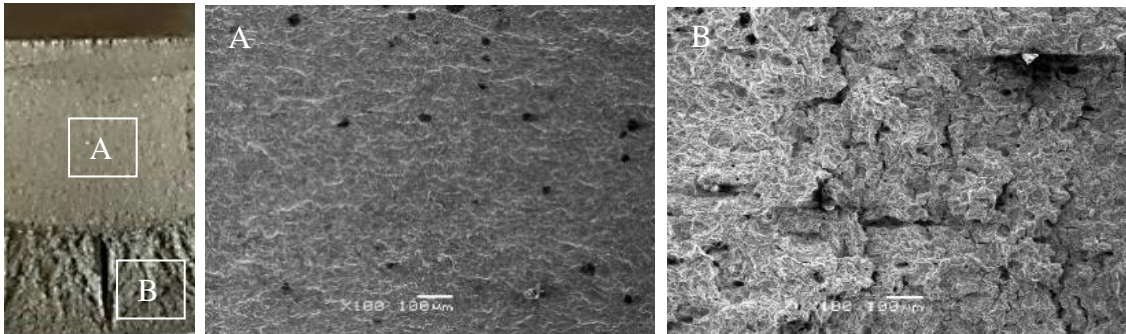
Macroscopic view of the fractured surface showing the morphologies of the fatigue crack growth area (A) and fast fracture area (B).
